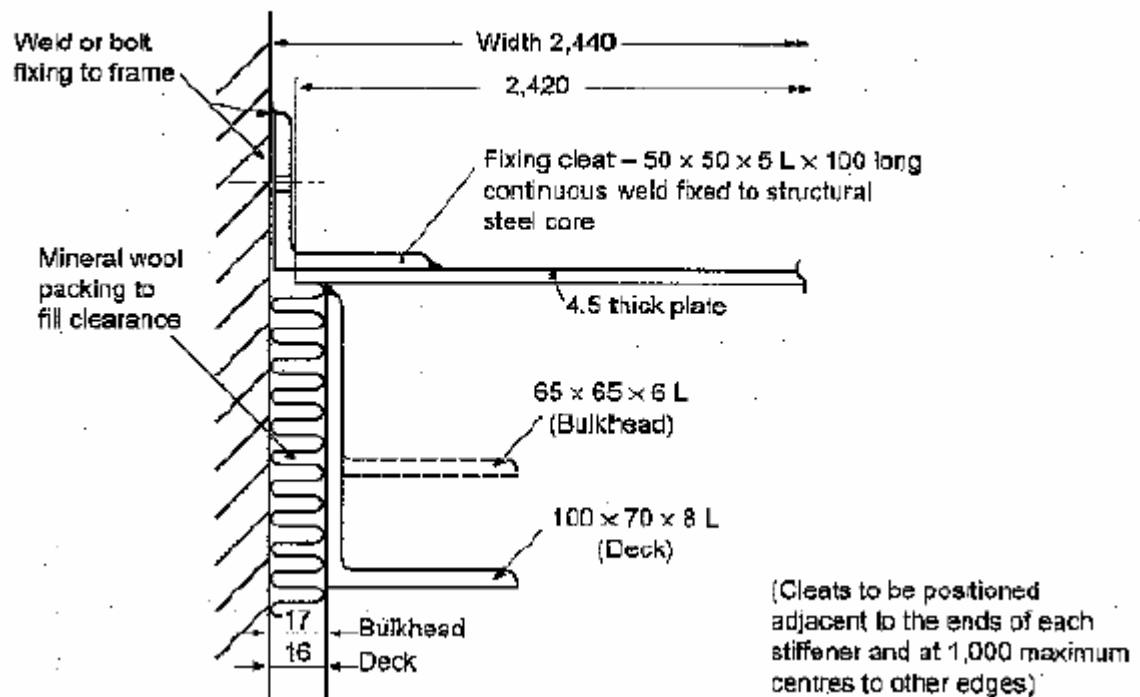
Structural steel core for “A” class deck and “B” class ceiling
